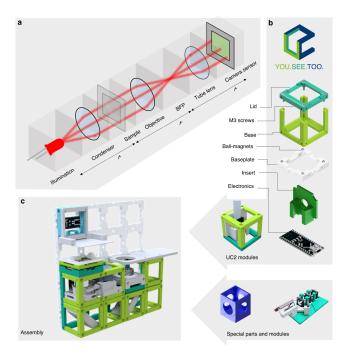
Example of manufacture of a microscope using UC2 by Diederich et al.[13].
